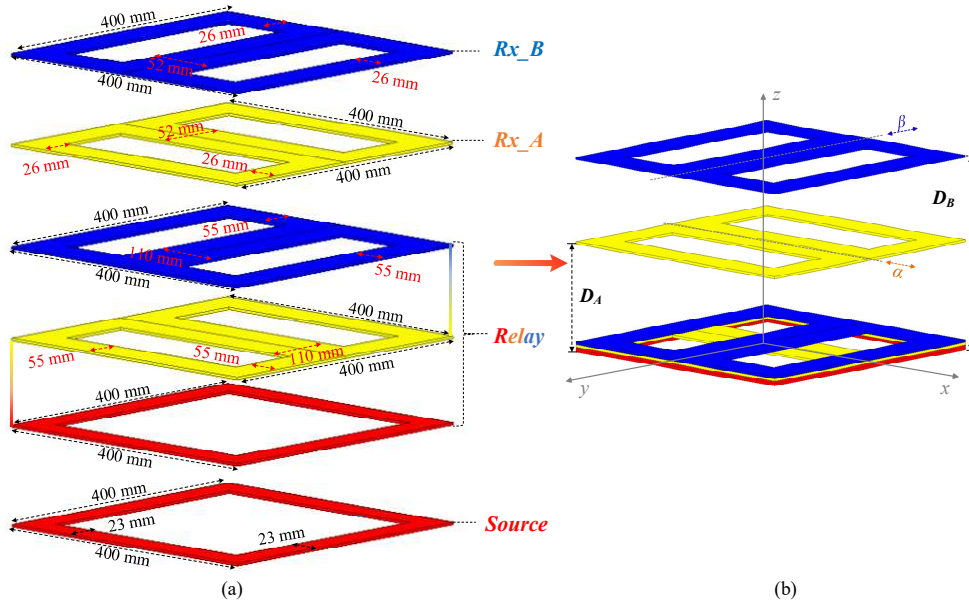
Diagrams of proposed magnetic coupler (a) Exploded view with size information and (b) The full assembly view.
